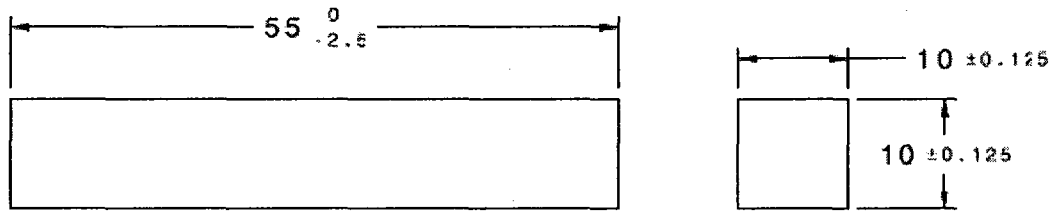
Charpy un-notched test sample. Dimensions in mm
